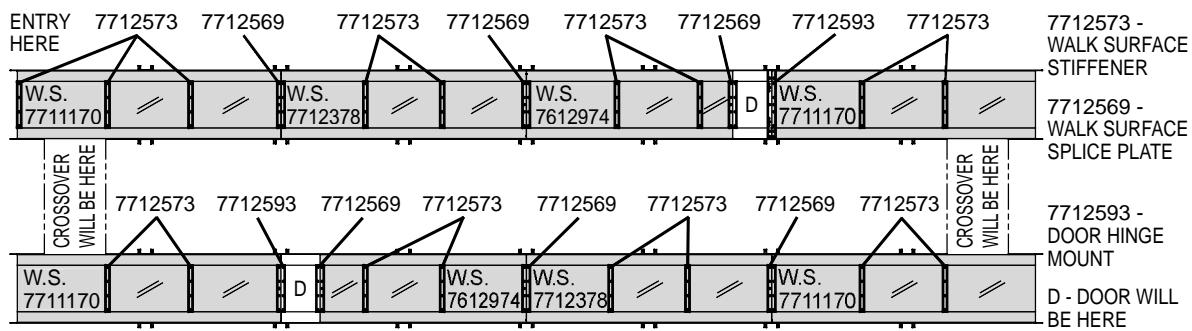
32' Catwalk Floor Structure Parts Required Layout, Top View
